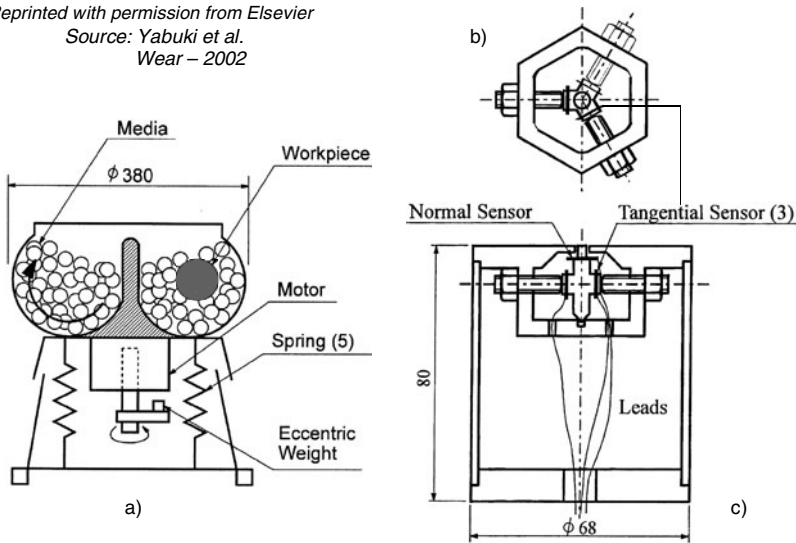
Schematic diagram of a bowl-type vibratory finisher (a) and the new surface force transducer (cylindrical workpiece) in plan view (b) and cross-sectional view (c)
